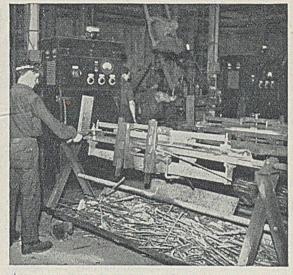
Trimming off the "Flash." This Operation is followed by Edge Grinding, Inspection and Despatch.
